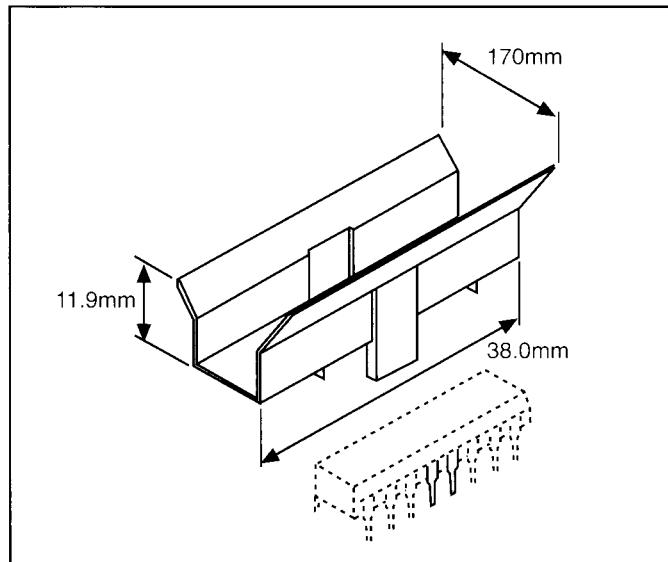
Figure A - External Heatsink Mounting Example ($\theta_{JA} = 25^{\circ}\text{C/W}$)
